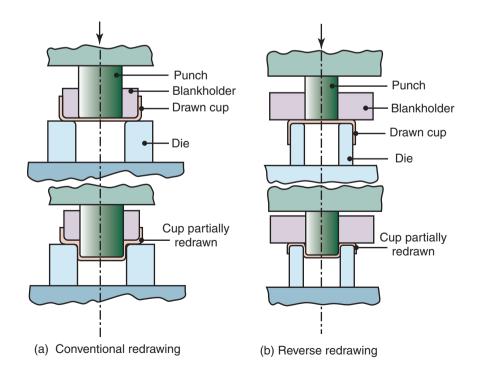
Reducing the diameter of drawn cups by redrawing operations: (a) conventional redrawing and (b) reverse redrawing. Small-diameter deep containers may undergo several redrawing operations.
